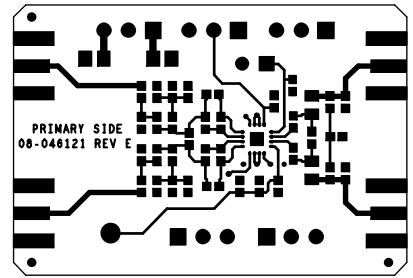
ADA4945-1CP-EBZ Evaluation Board Layout Pattern, Primary Side
